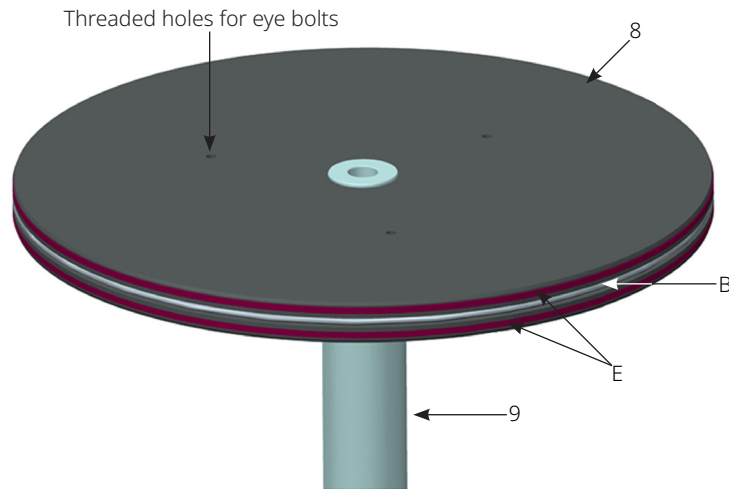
shows, in detail, the thrust flange (8), the stem (9) onto which the flange is screwed, the outer seal of the piston (B), the sliding rings of the piston (E) and the threaded bores, on the upper face of the thrust flange, to be used for unscrewing and removing the flange from the stem.
